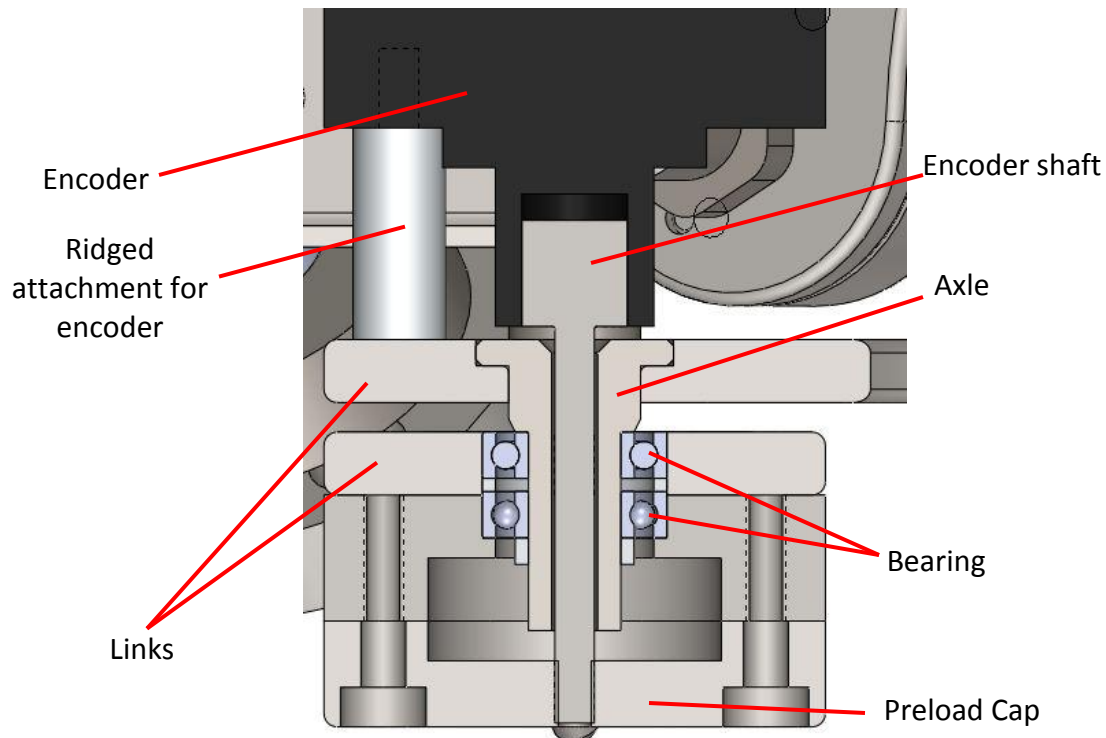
Cross section of links at joint highlight bearings, encoders and links
